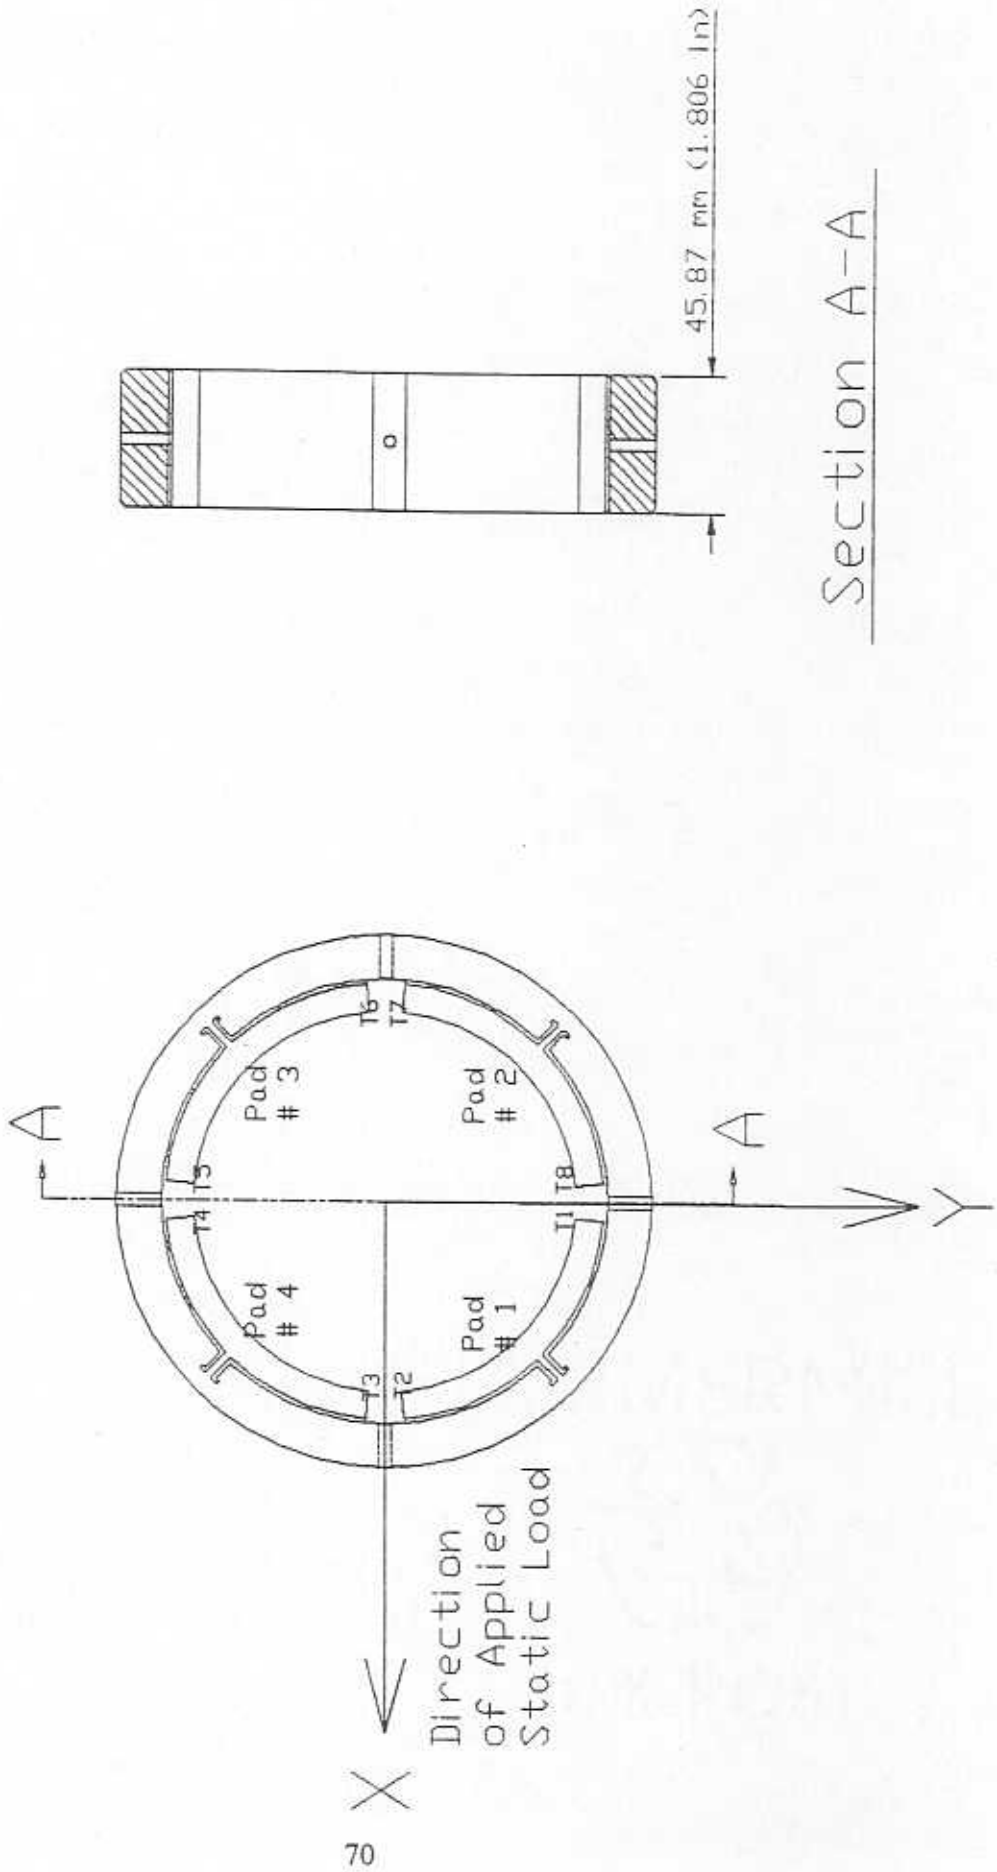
KMC Flexure Pivot Tilt Pad Bearing
